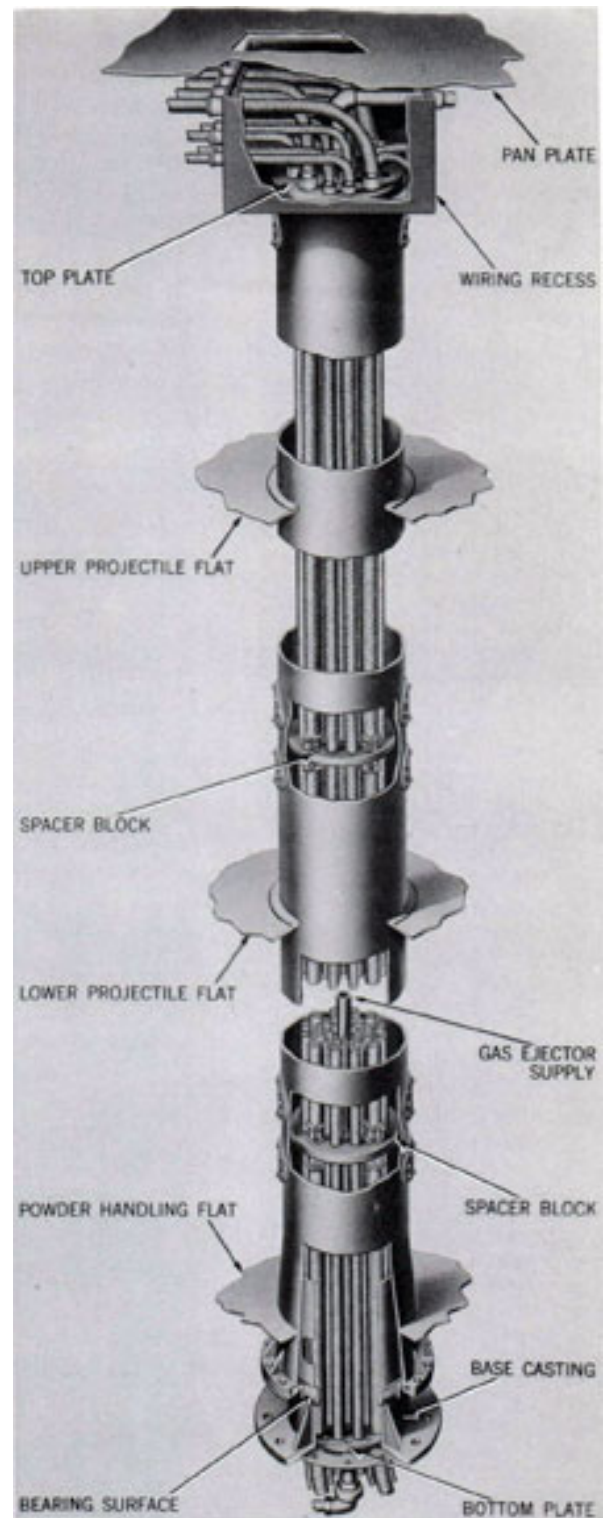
Base Casting and Central Column Wiring Tube Arrangements
